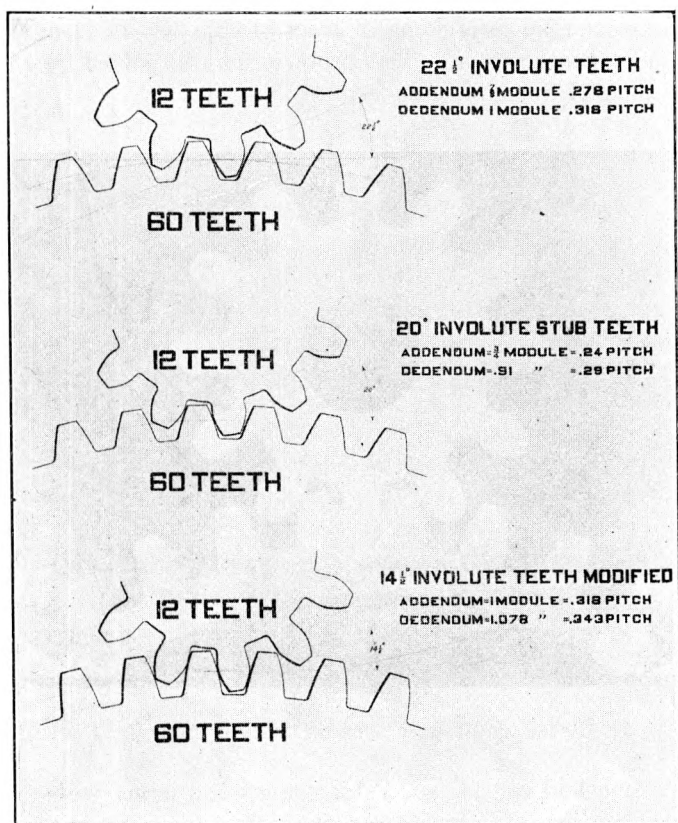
GEAR TYPES TESTED IN THE MACHINE
